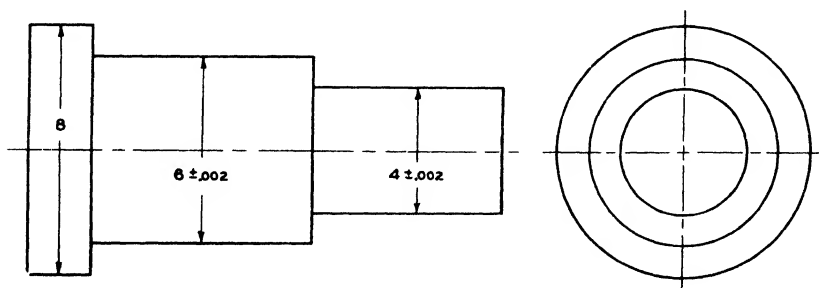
Example of Machine Part Illustrating the Machining Problem
